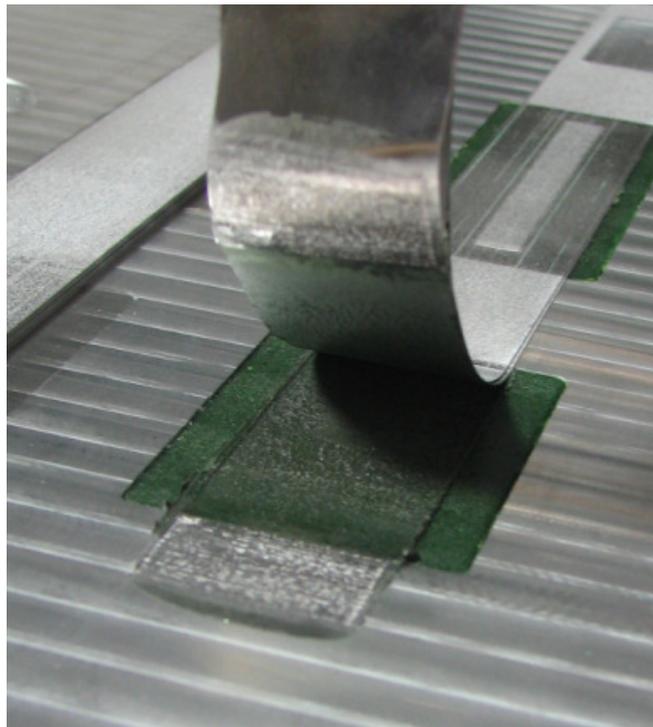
Casting wax was melted and squeezed out along tape edges and between the foil and build plate.
